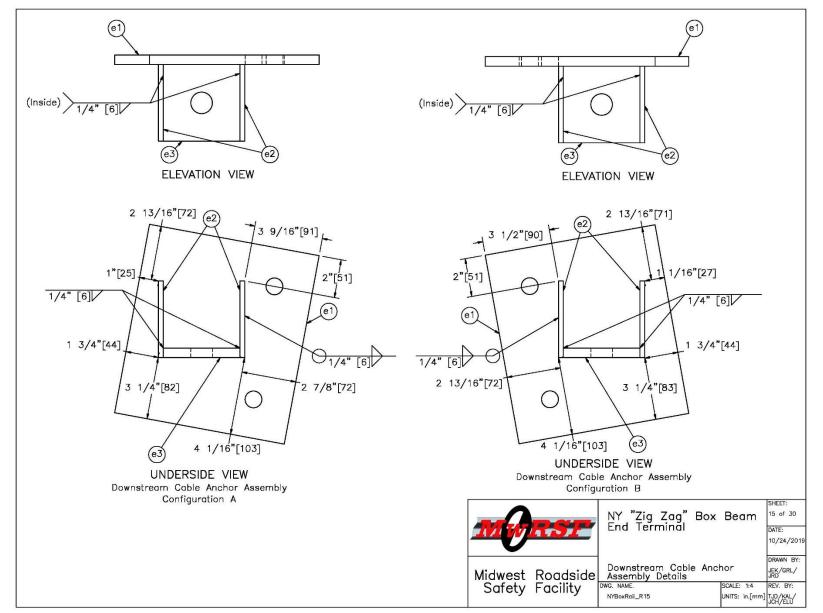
Downstream Cable Anchor Assembly Details, Test No. NYT-1
